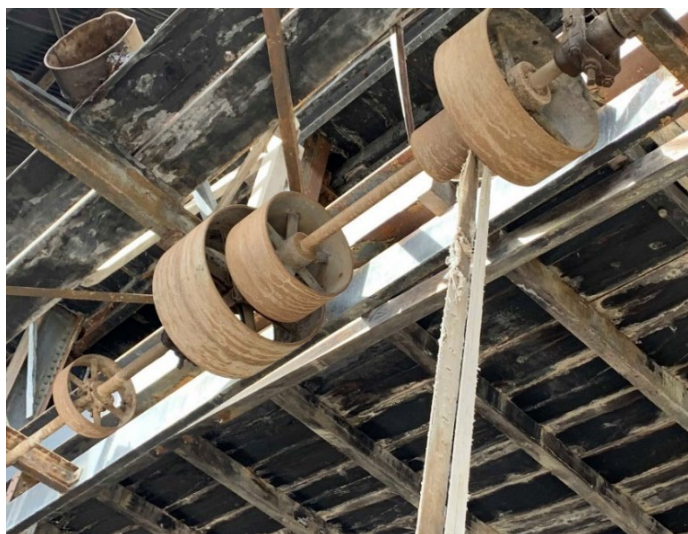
A few of the overhead driveshaft, pulleys and belts inside the mill.
